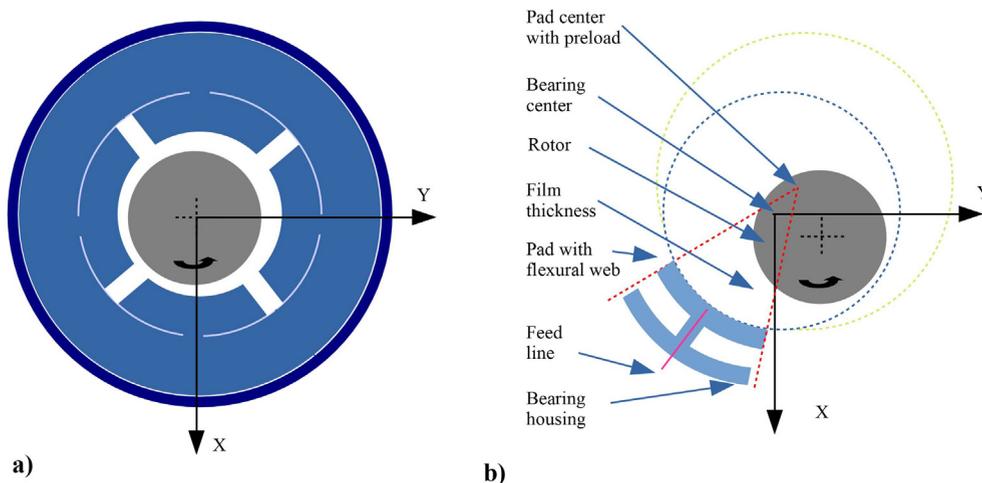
a) Flexure pivot tilting pad gas bearing, b) geometry of the bearing. Figure based on [161].
